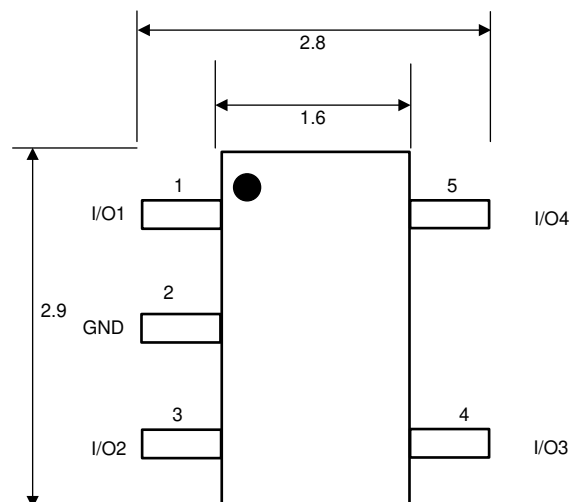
ESDS304 DBV Package, 5-Pin SOT23 (Top View)
